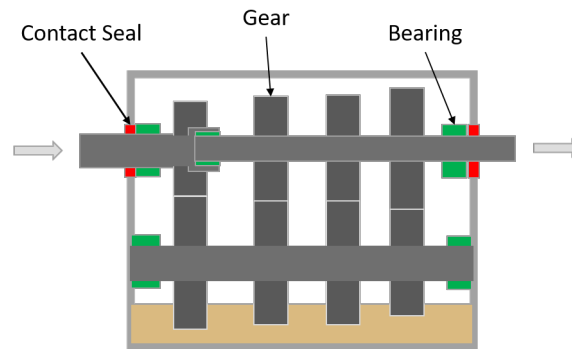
A schematic of a typical gearbox configuration. Arrows show component type and colors indicate same type of component
